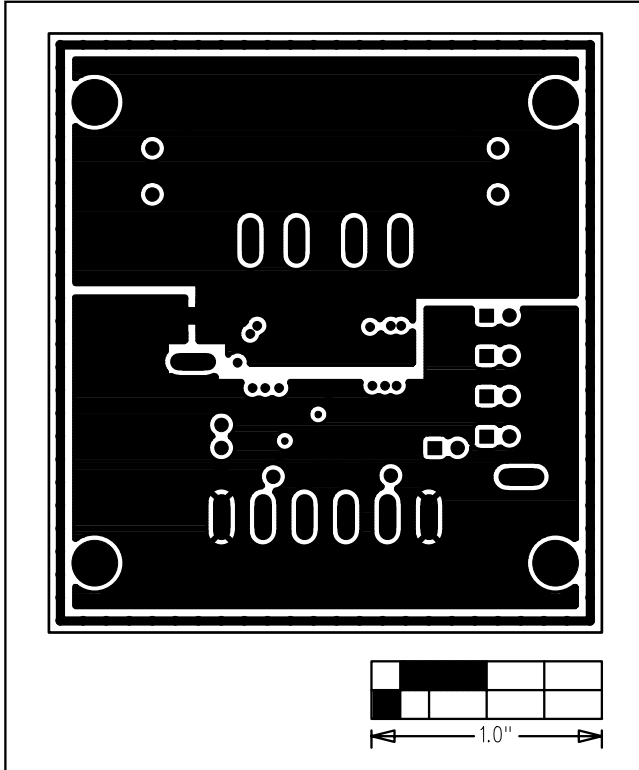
MAX9714 EV Kit PC Board Layout—Layer 2 (GND)
